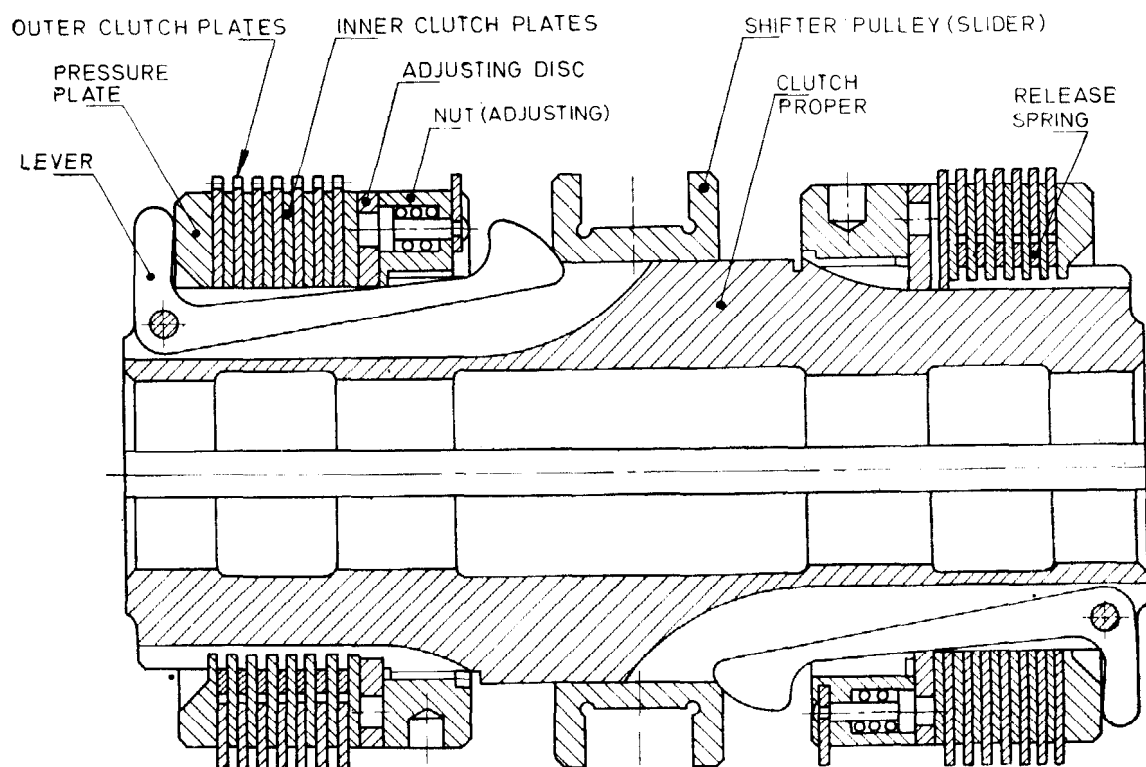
MECHANICAL MULTI-DISC CLUTCHES, DOUBLE ACTING
